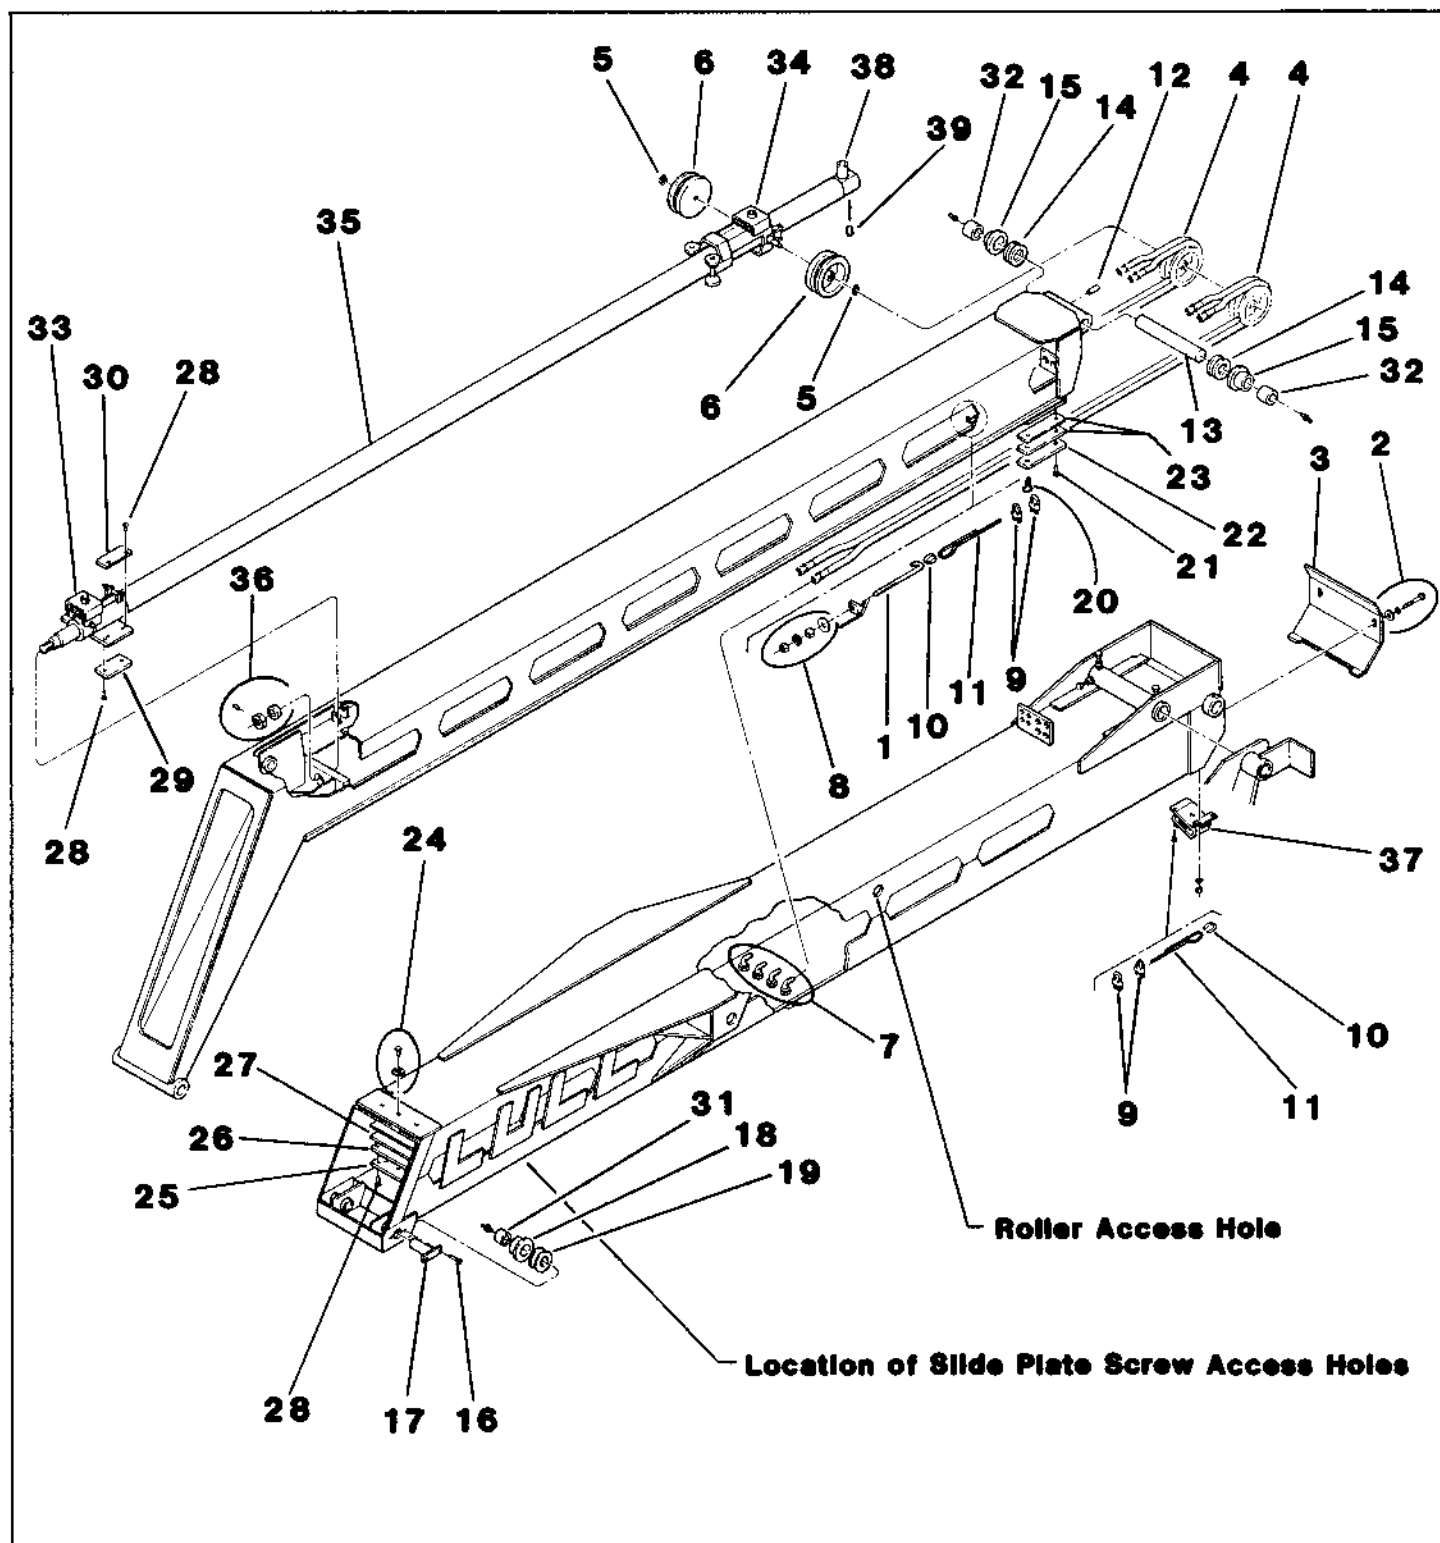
Hoses, Hose Sheaves, Cable, Rollers, Shims, Bushings, and Slide Plates Removal (Models 644, 844)
